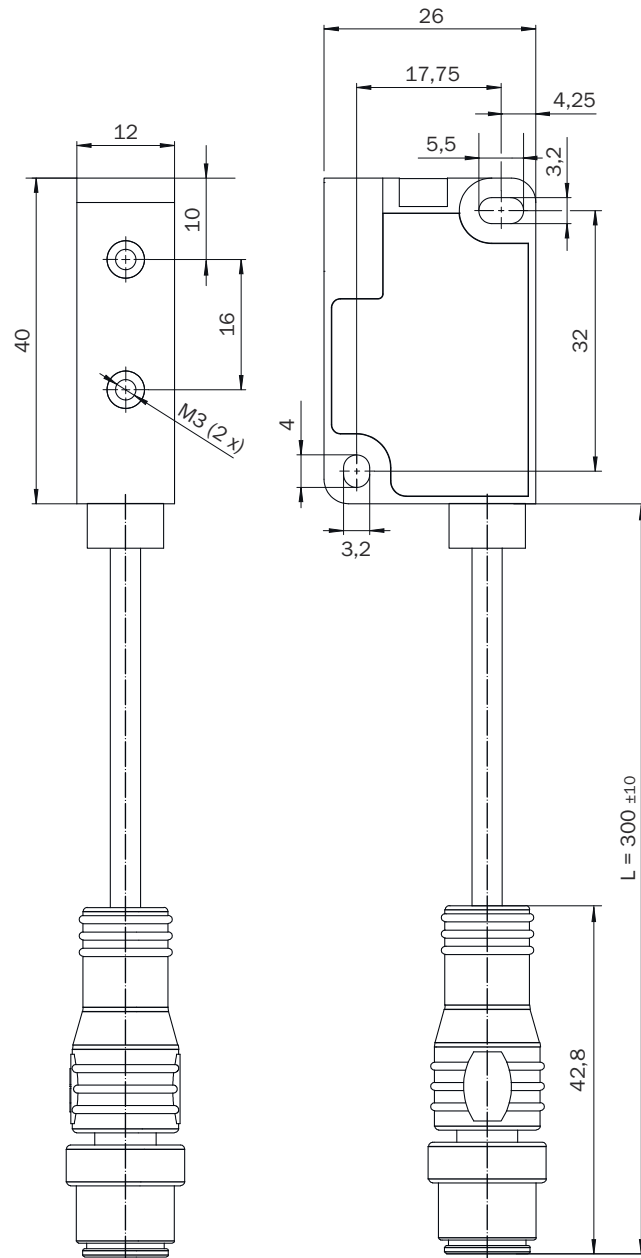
IQB2S12-\*\*B\*\*Q9 dimensional drawing
